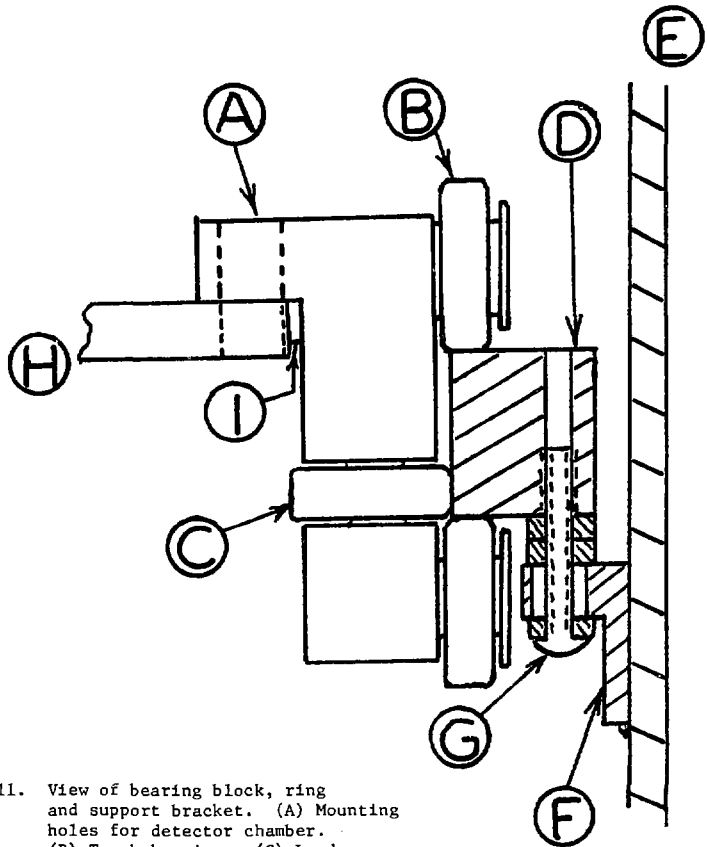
View of bearing block, ring and support bracket. (A) Mounting holes for detector chamber. (B) Track bearing. (C) Load bearing. (D) Ring. (E) Main chamber wall. (F) Support bracket. (G) Ring mounting screw and nuts. (H) Detector chamber bottom plate. (I) Shims.
